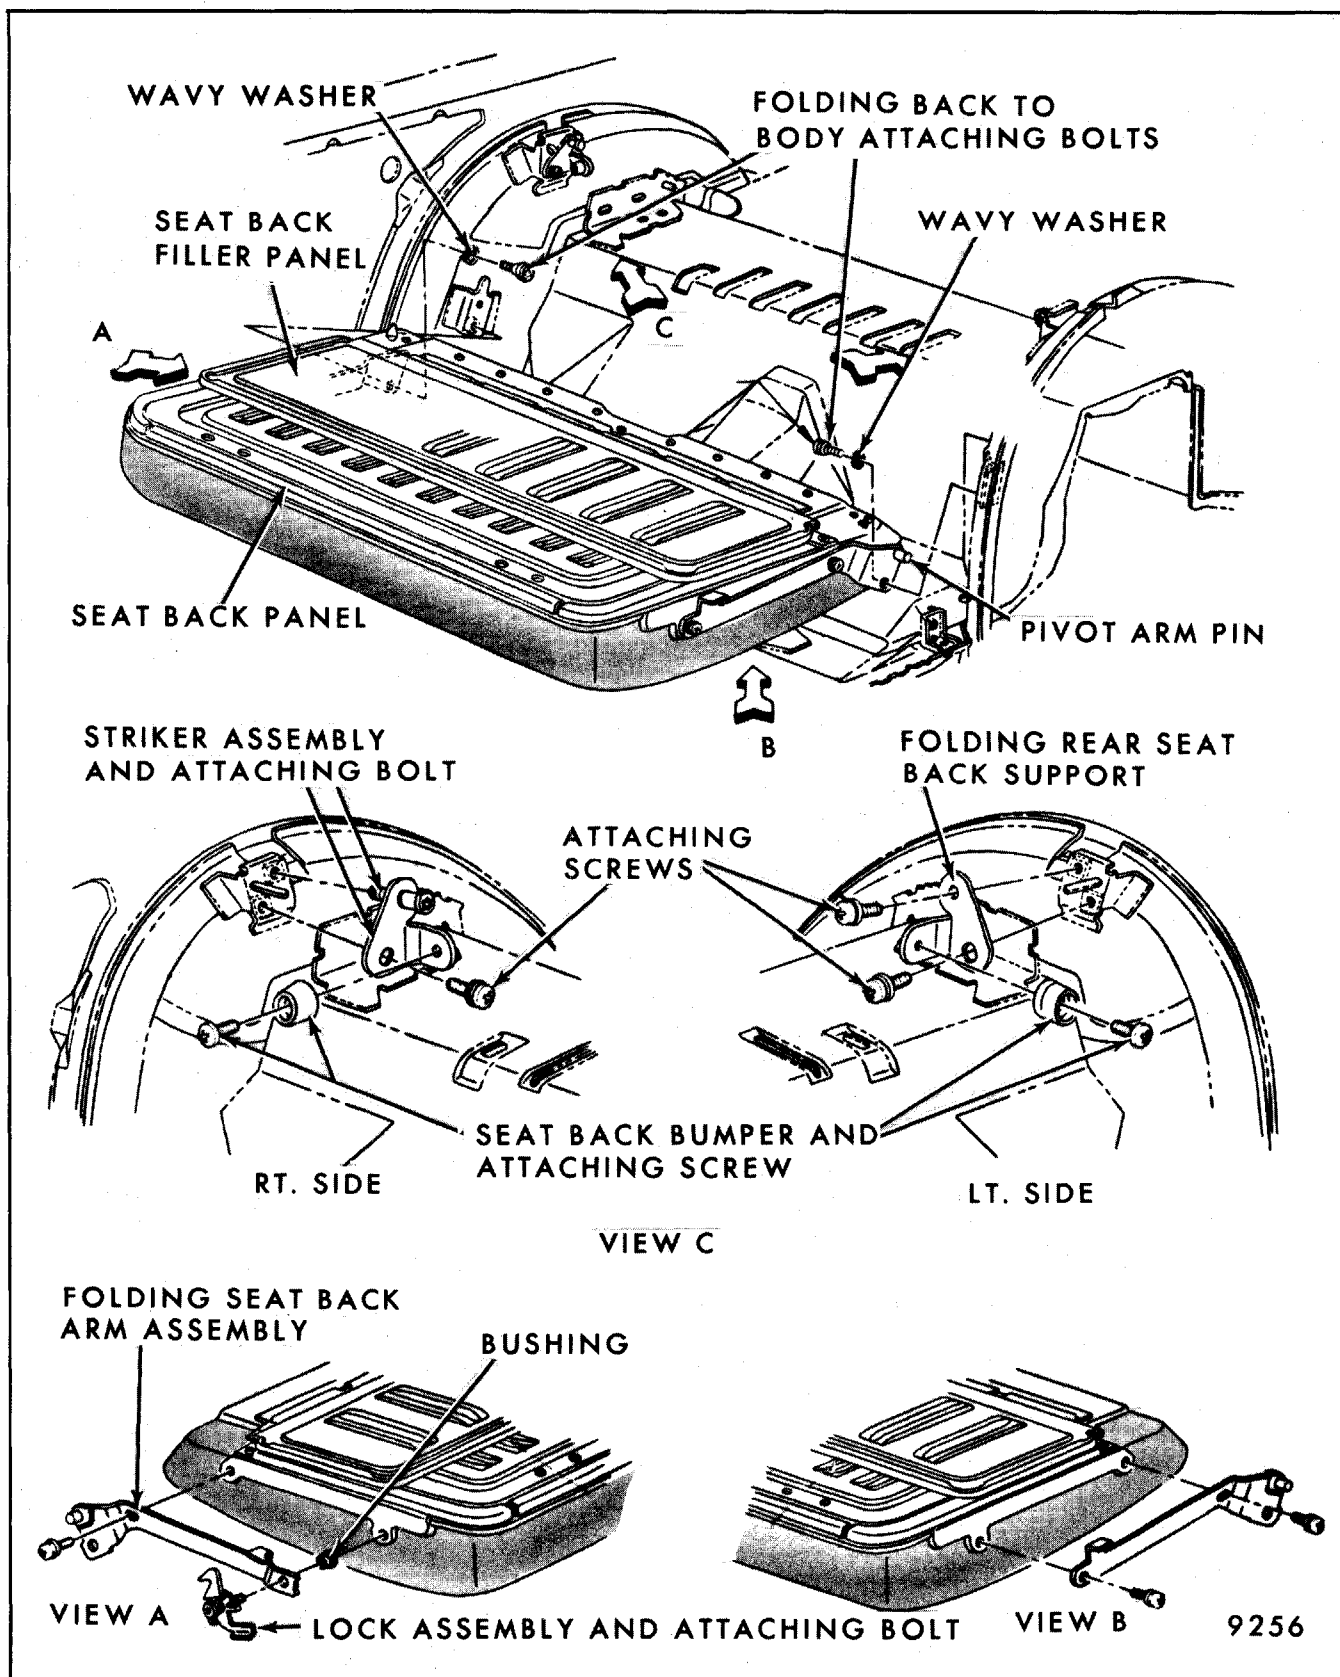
Folding Rear Seat Back and Lock Installation Assembly - "H-07, 15, 27 and 77" Styles Shown ("X-17" Styles Typical)
